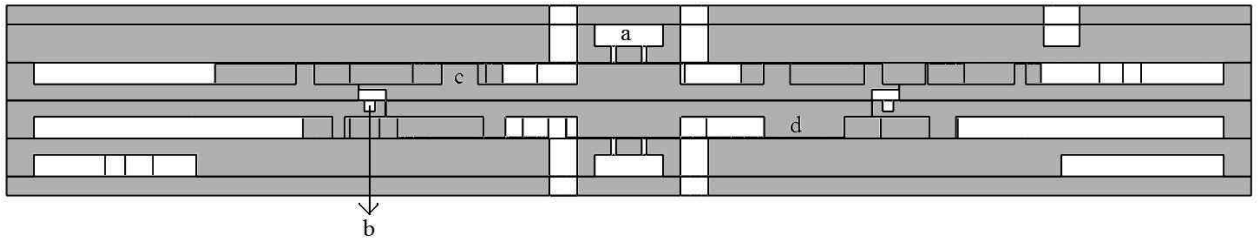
Overview of micro-turbocharger (a : thrust bearing, b : journal bearing, c : compressor blade, d : turbine blade)
